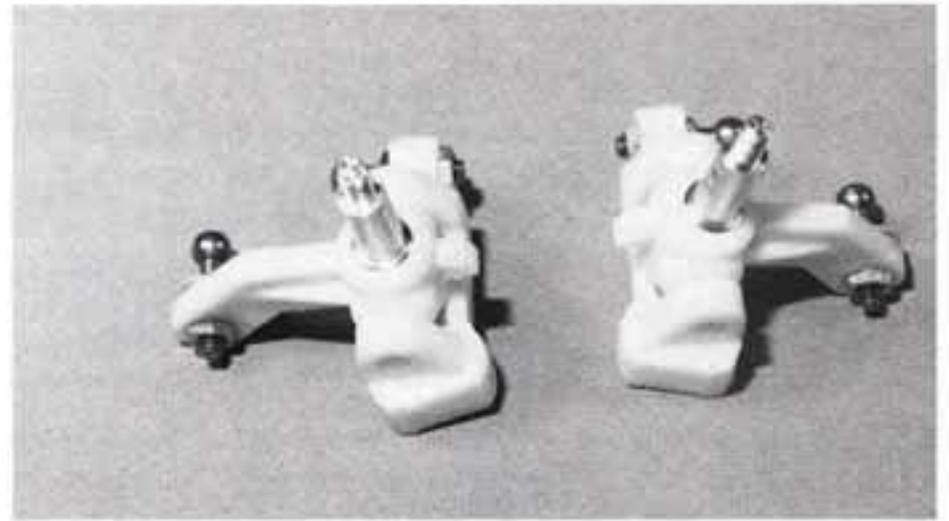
In bag #6-1 you will find two #6223 kingpins. This bag contains several different length pins, so match the pins to the actual-size drawing below. Check that each kingpin will go through both steering blocks and axles. If you don't do this, it will be almost impossible to get the kingpin to go through the #6210 carrier block and the steering block and axle when we assemble them. Once you have checked the fit of the kingpins, remove them again.
